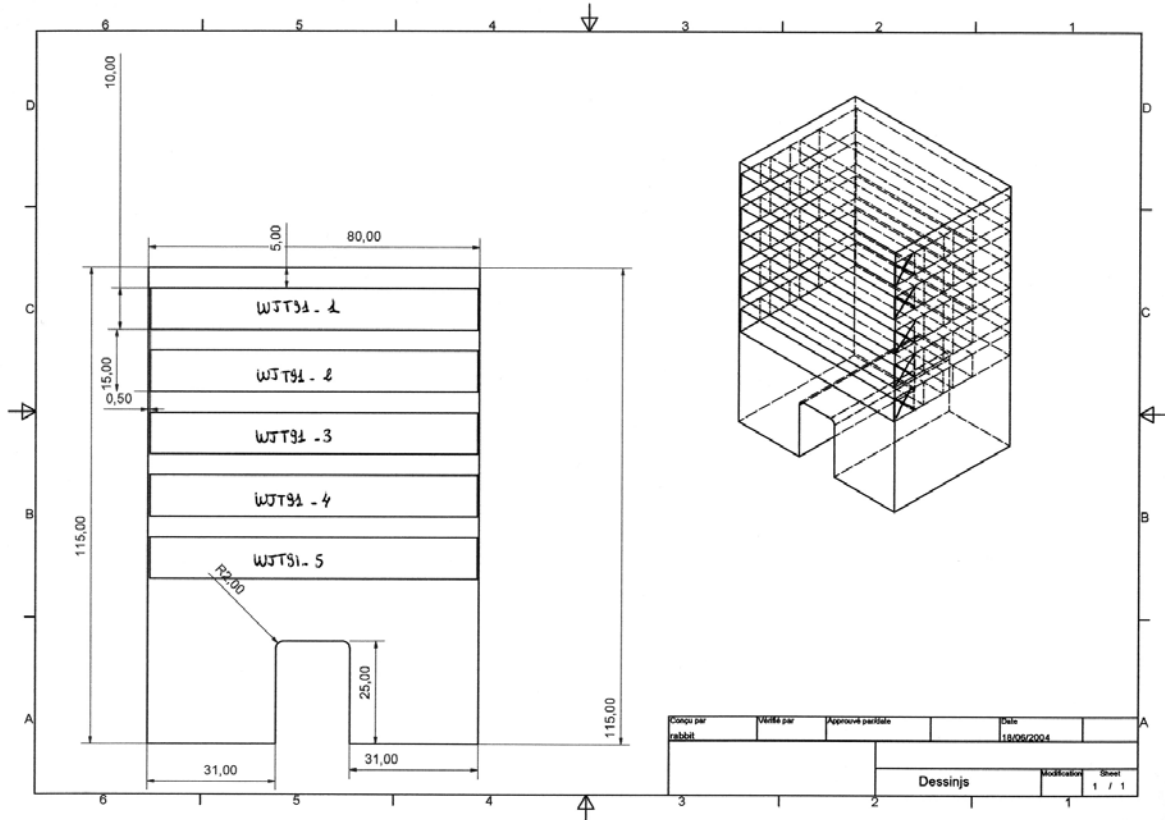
Location of creep test specimens in WJT91 weldment (1)
